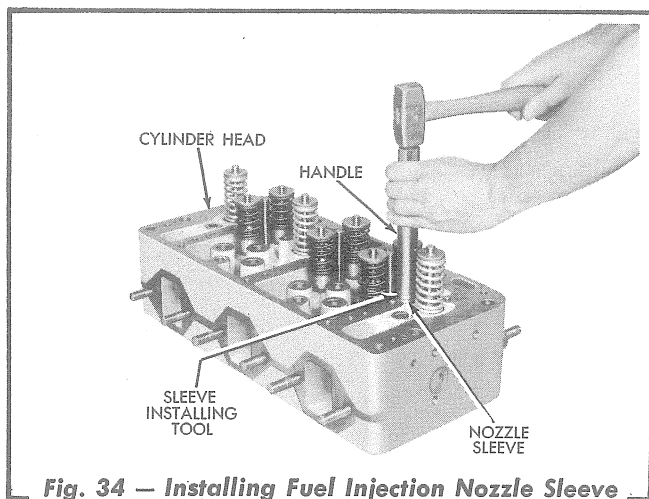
Installing Fuel Injection Nozzle Sleeve
